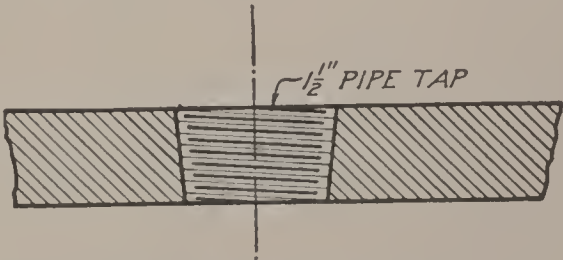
Conventional Drawing of Thread in a Pipe Fitting
